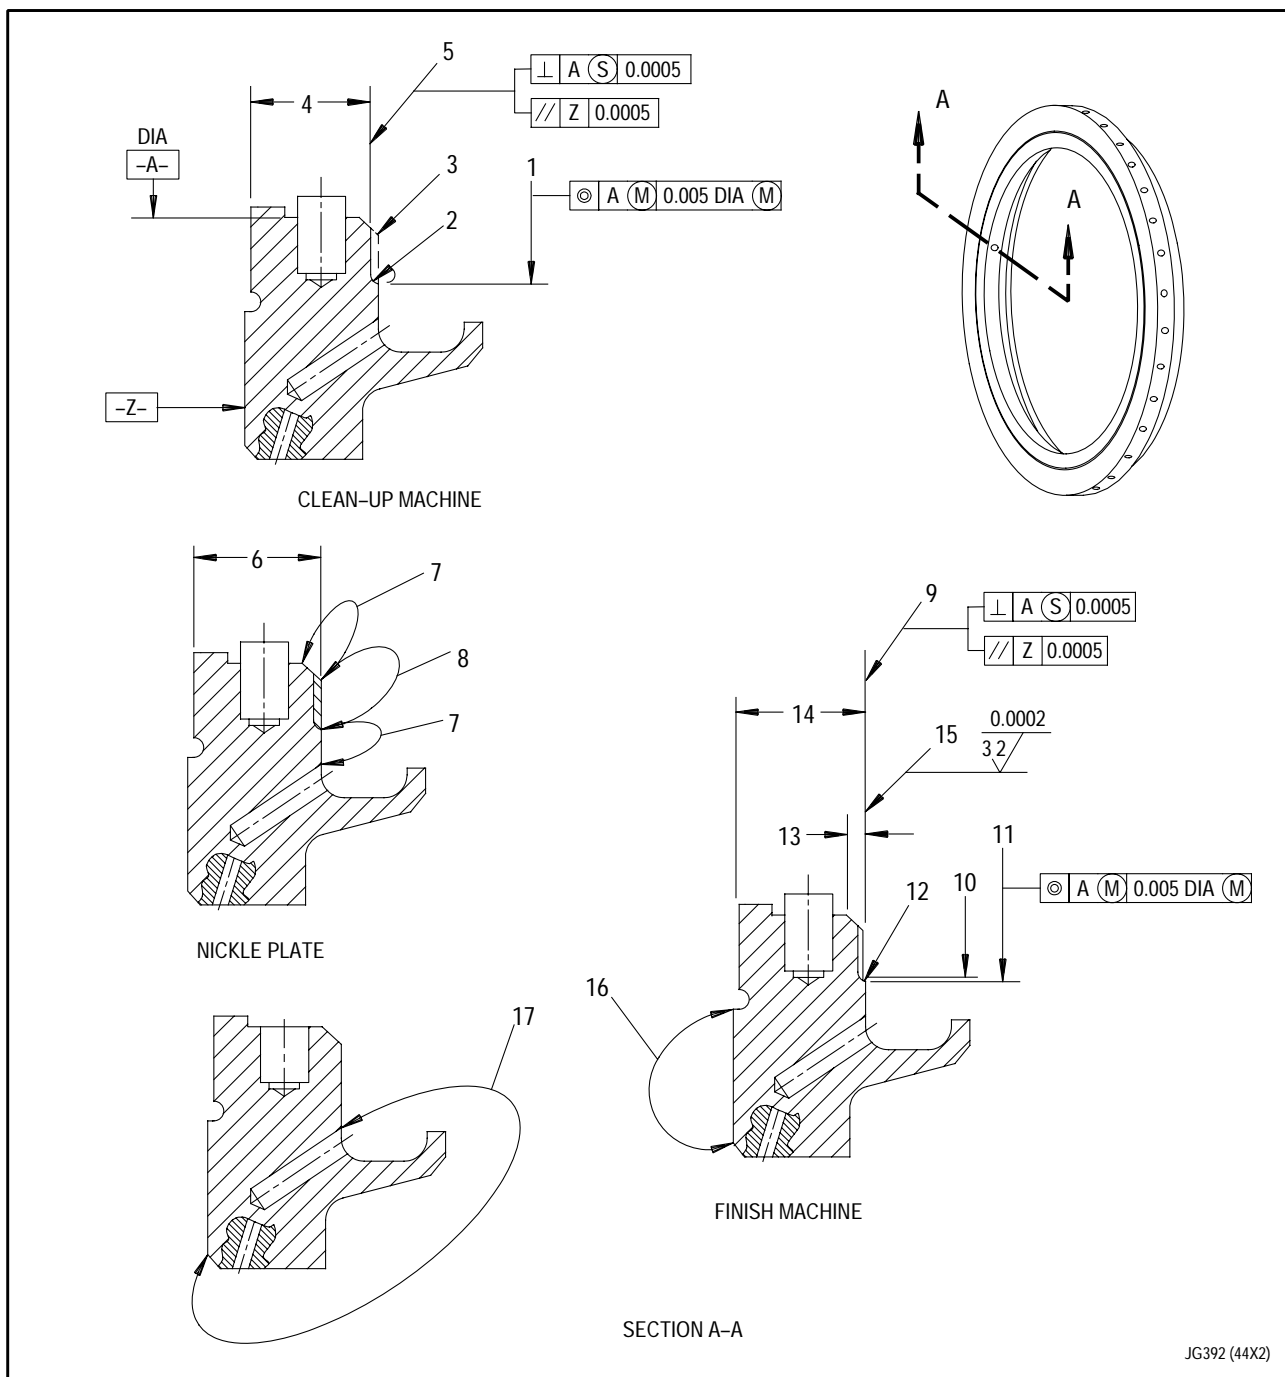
No. 3 Bearing Front Seal Seat Assembly - Nickel Plate Repair of Rear Inner Face
